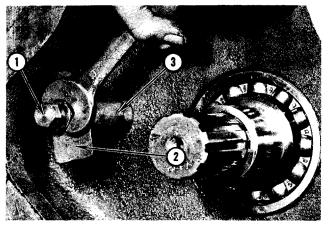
PULLING REVERSE IDLER SHAFT LOCK
